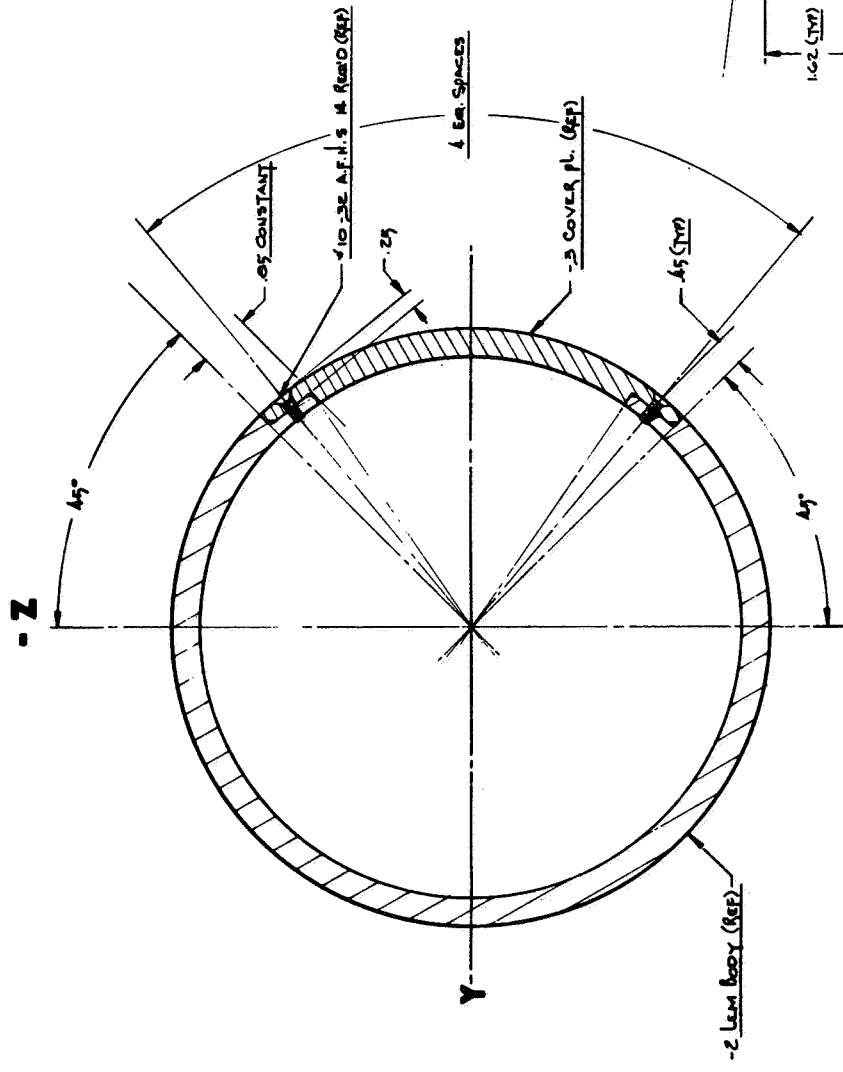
LAUNCH ESCAPE MOTOR NOZZLE 29 REAR
